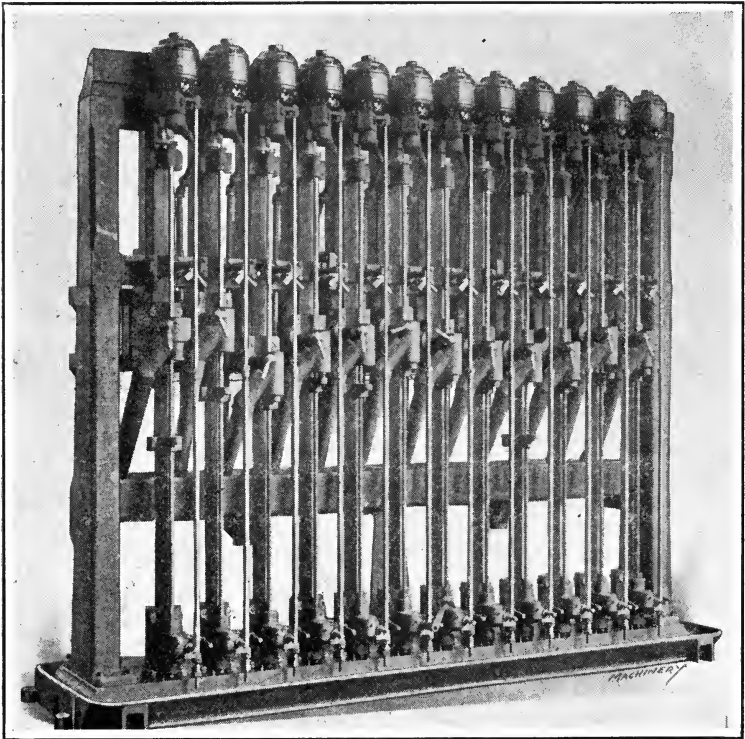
Westinghouse Rifle Barrel Drilling Machine that Works on Twelve Barrels simultaneously
